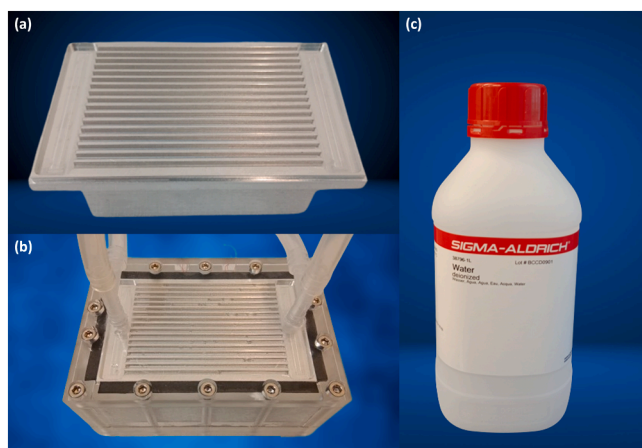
(a) Manufactured heat sink, (b) heat sink assembly, and (c) coolant used during this study.
